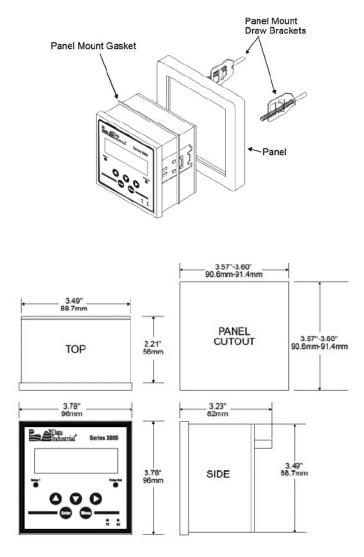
Series 3000 Panel Mount and Mounting Dimensions
